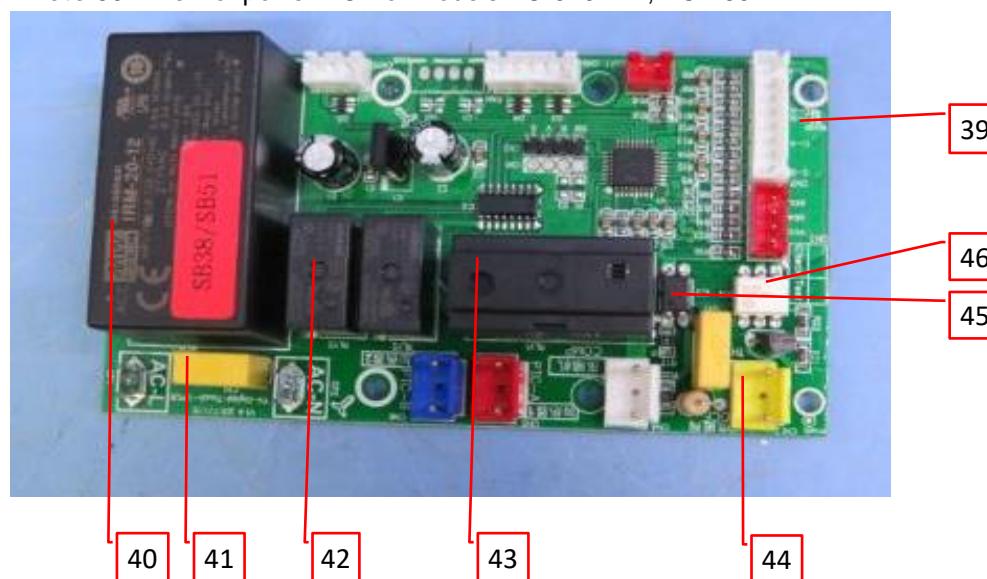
View of power PCB of models YC-510D2Z, YC-760
